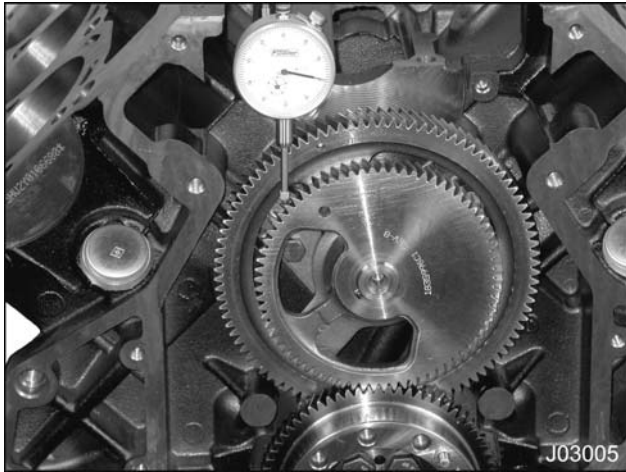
Primary balancer gear-to-crankshaft gear backlash
